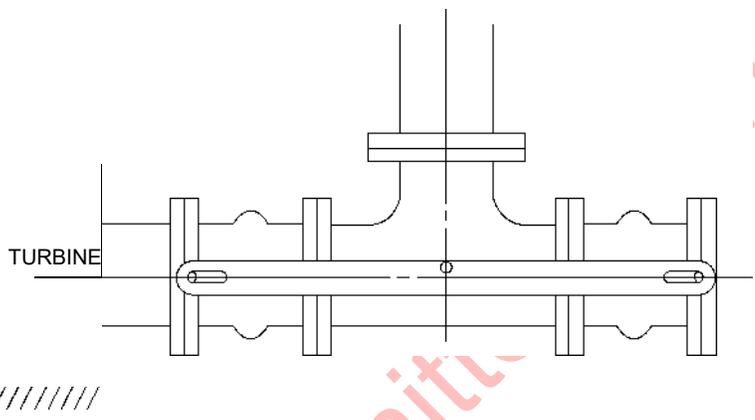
Exhaust Piping Expansion Joint Application Utilizing Tie Rods
